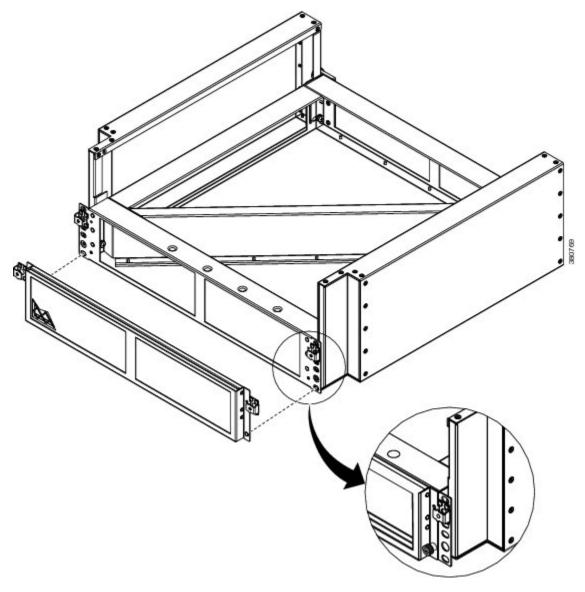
Attaching the Air Filter Assembly to the Plenum Assembly
